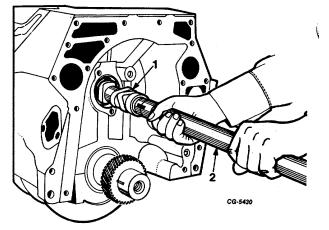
Use of SE-1880 Camshaft Installer and SE-1880-2 Adapter
